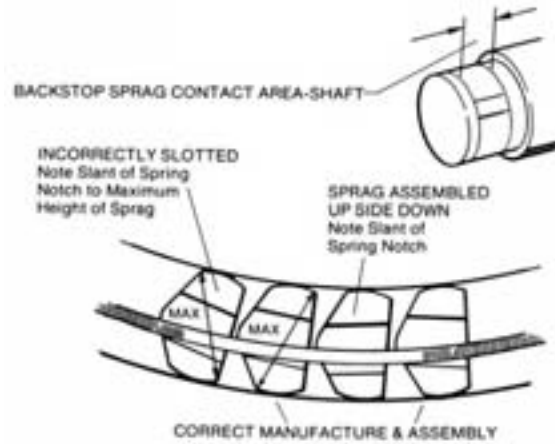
IMPROPER ASSEMBLY AND SPRAG MANUFACTURE
